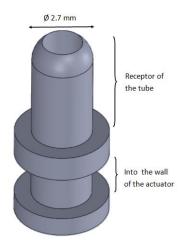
Nozzle linking the actuator and the 3mm tube connected to the pump
